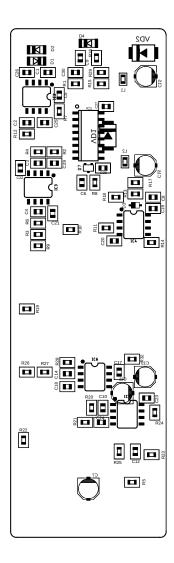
Surface mount device board component placement for V1.7 (bottom view).
